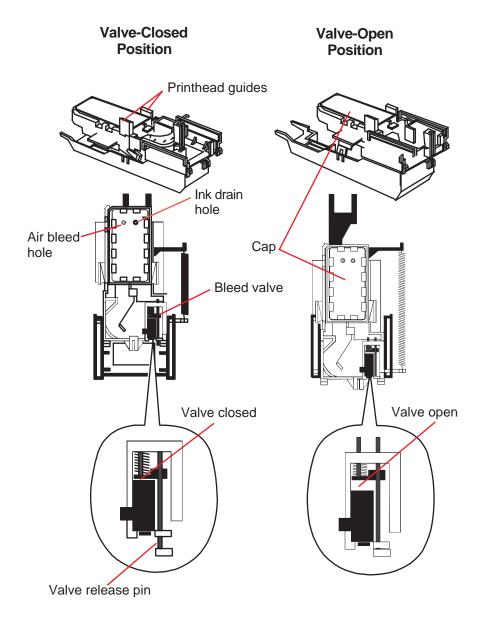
Capping Mechanism - Bleed Valve Operation
